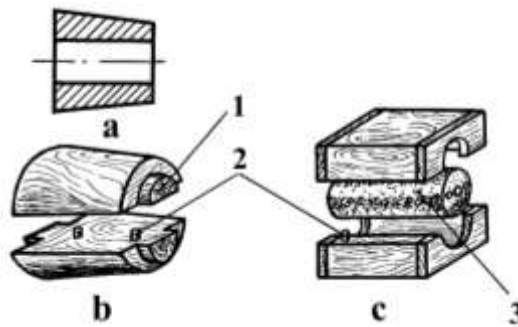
Casting (a), pattern (b) and core box (c): 1-core print; 2-slotted key; 3-core
